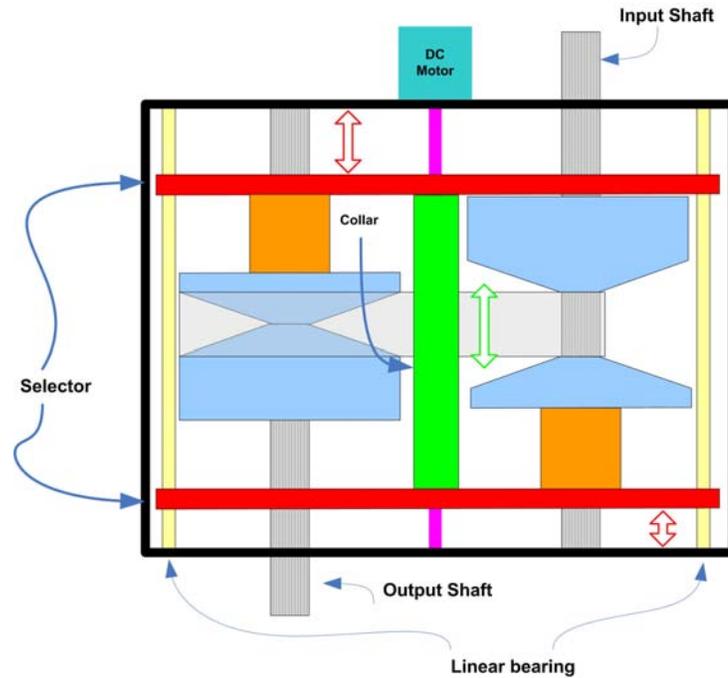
Pulley displacement with linear bearing support of a single power screw.
